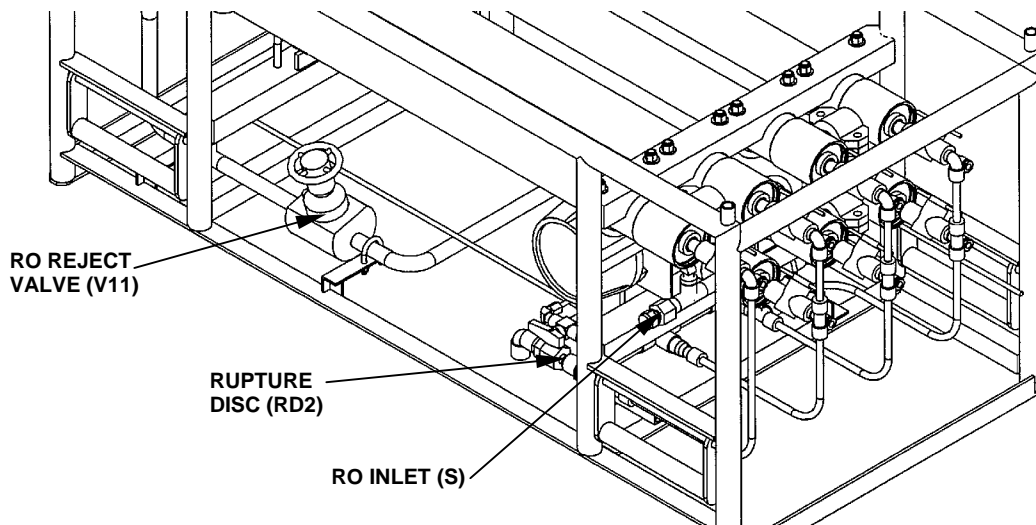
RO Module High-Pressure Inlet Hose Connection.
